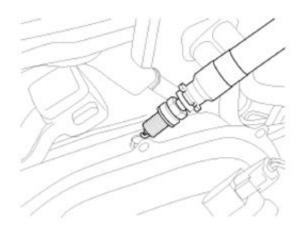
Checking Spark Plug Courtesy of HYUNDAI MOTOR AMERICA
